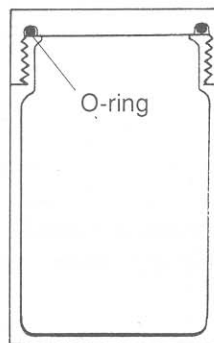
Cross section of a metal container with screw lid and O-ring seal.
